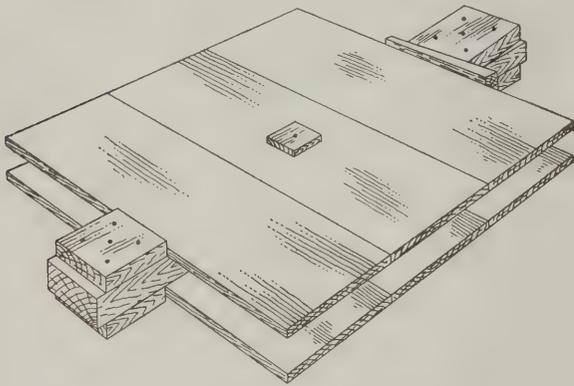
View of Double Clamp with the Two Bottoms in Position and the Blocks of Wood in Place
